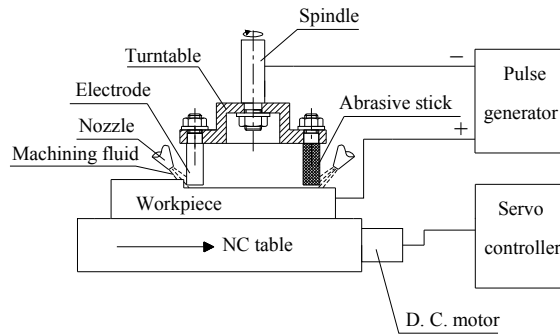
Schematic illustration of end ED milling and mechanical grinding of SiC.
